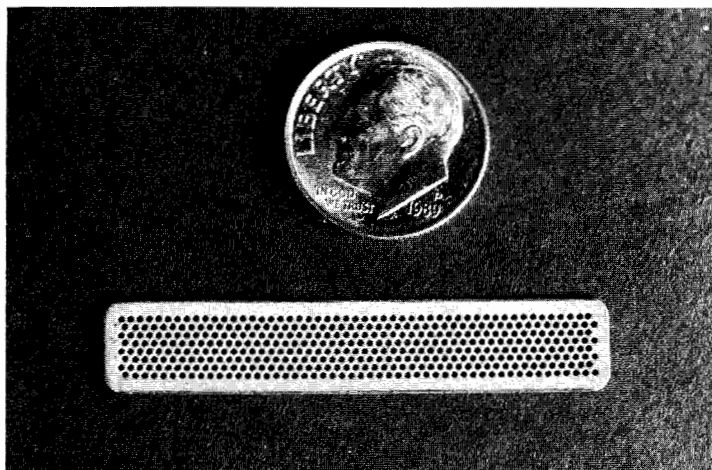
Shown above is a photograph of the current 408-hole tube-strip.
